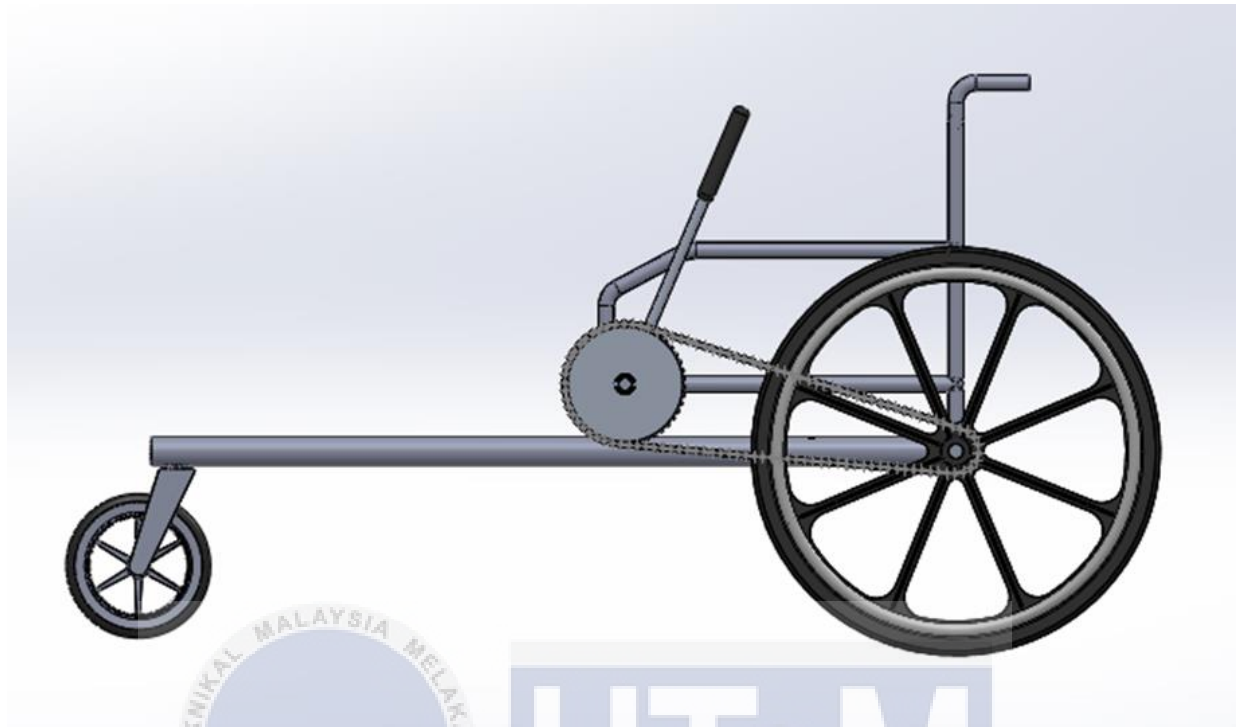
Full Assembly Lever-Chain Wheelchair
